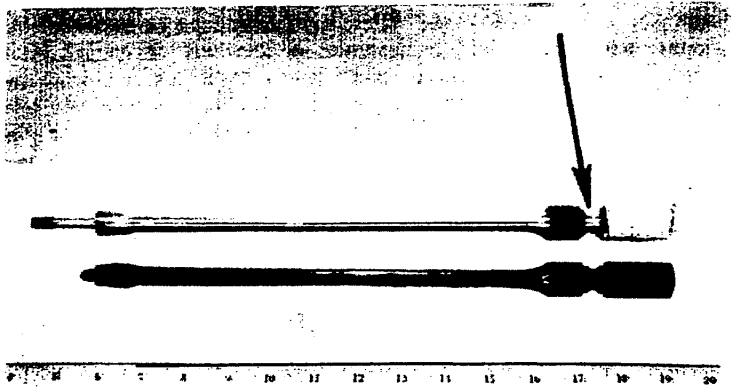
Photo A. Fractured generator shaft is shown at the bottom of photograph. A new shaft is also shown. Arrow indicates the area required by design to fail when the shaft is overloaded.
